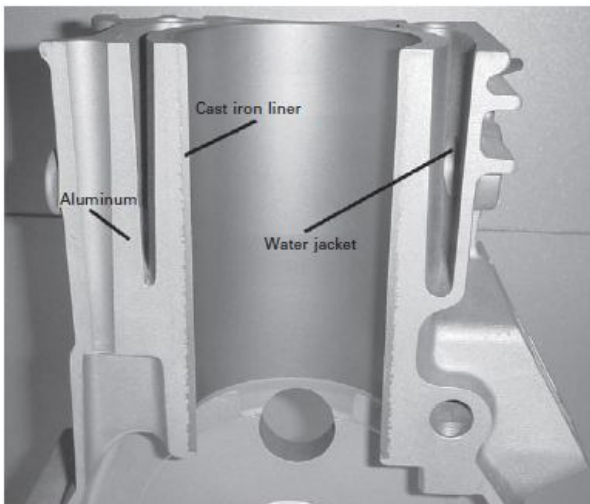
Cutaway of an Aluminium Block Enclosing a Cast Iron Liner having Dimpled Outer Surface.
